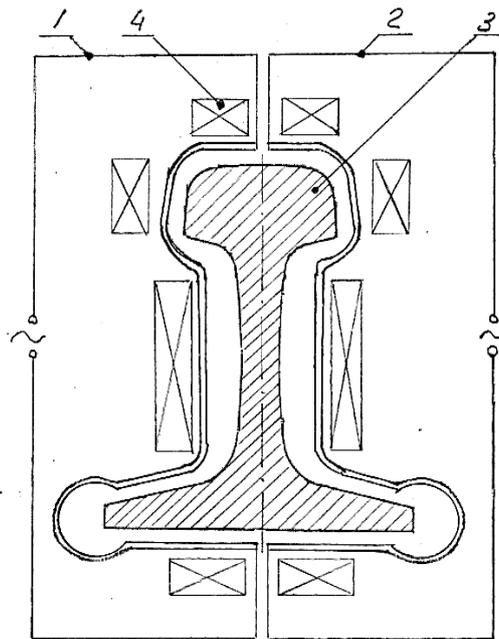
Inductors for heat treatment of welded joints of railway rails:
